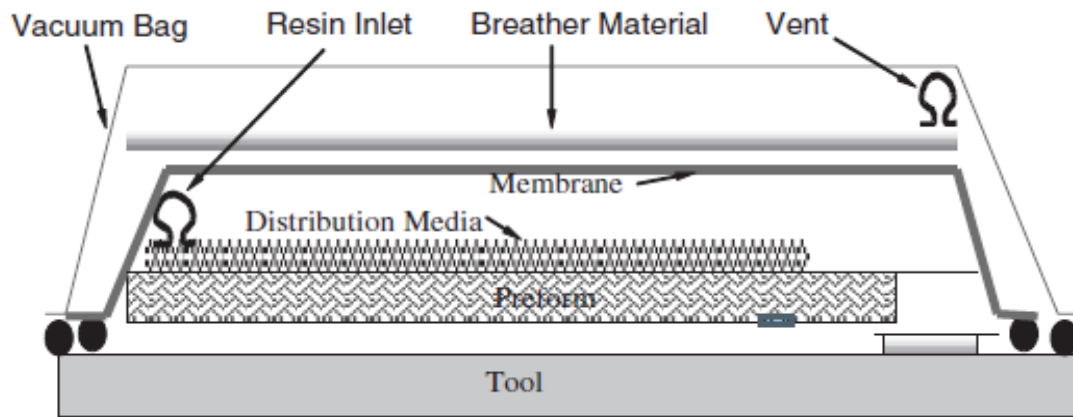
Vacuum bagging apparatus for resin infusion of composite parts
